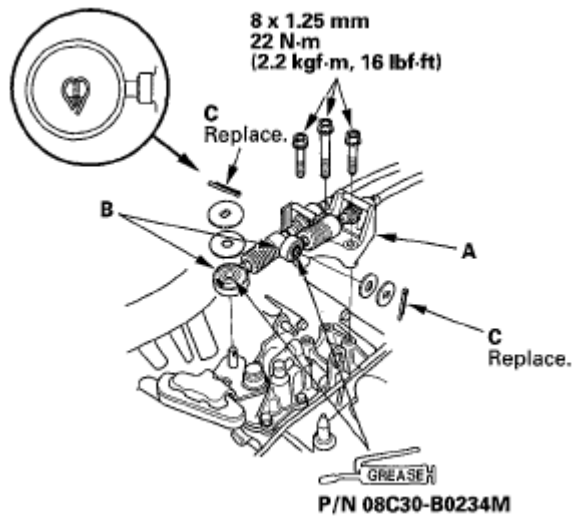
Identifying Cable Bracket, Cables And Shift Cables With Torque Specification
